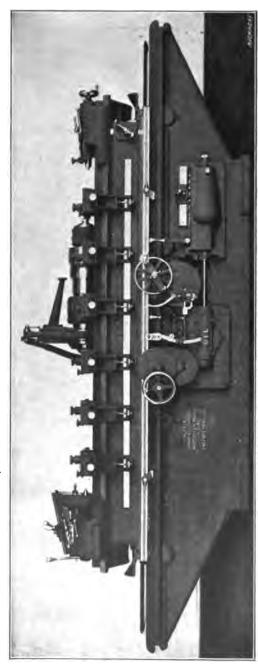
Norton Cylindrical Grinding Machine of the Plain Type
